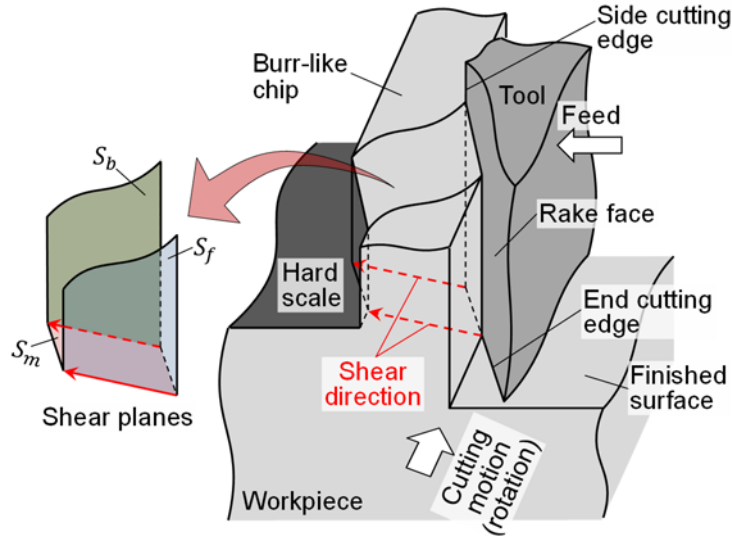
Perspective close-up view of peel cutting process and unique shear planes
